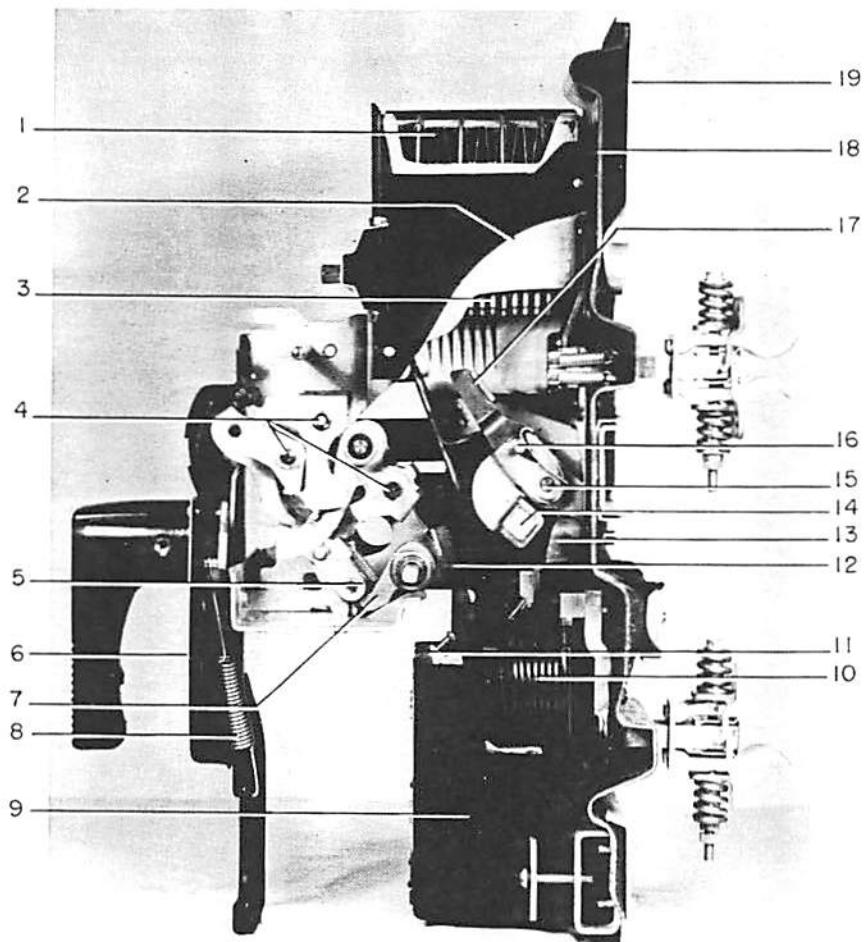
(8024516) Cut Away Model of Manually Operated AK-2 Breaker
